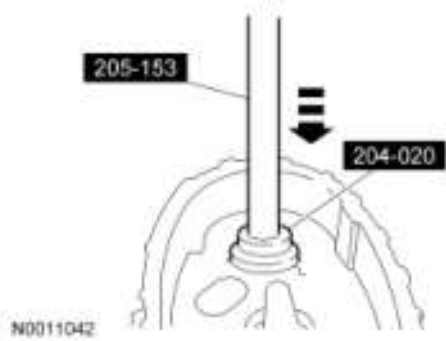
Installing Rear Output Shaft Rear Bearing Into Case Using Special Tools (205-153, 204-020)
